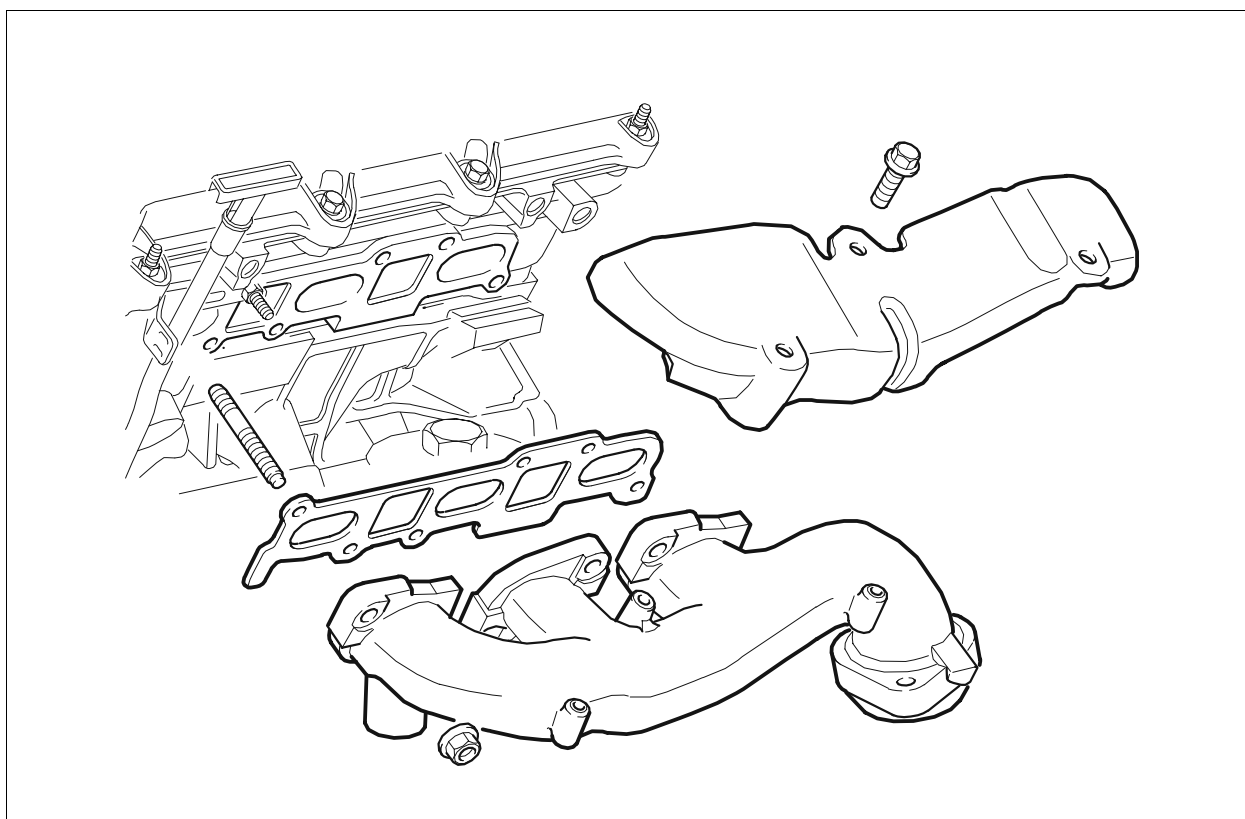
EXHAUST MANIFOLD AND HEATSHIELD
